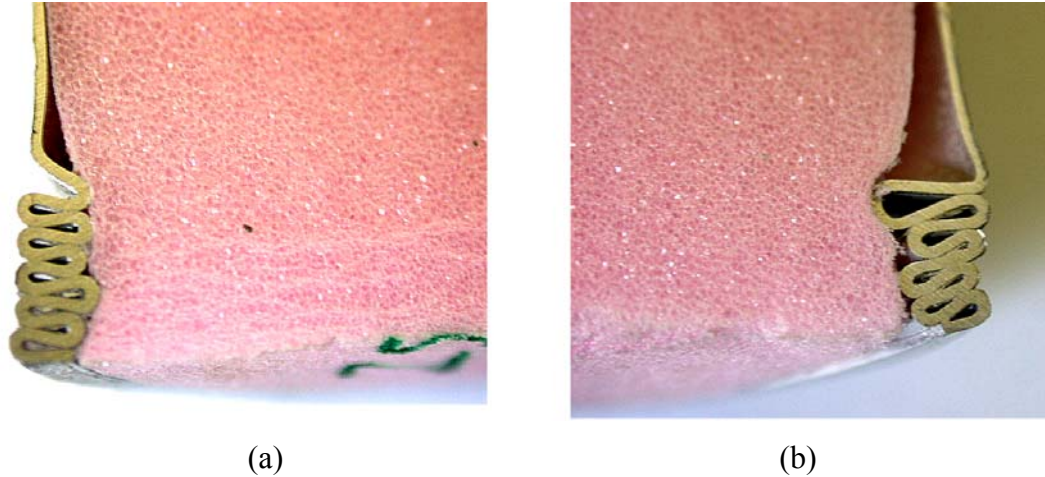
F3500 partially filled 25 mm Al tubes; a) with adhesive and b) without adhesive.
